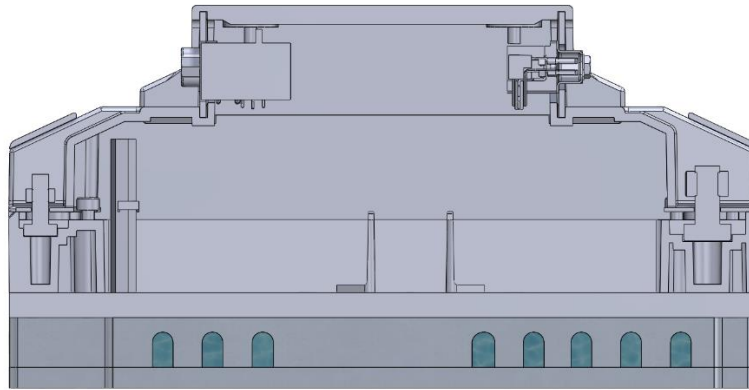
Motor inverter and Cold Plate assembly CAD cross-section representation.
